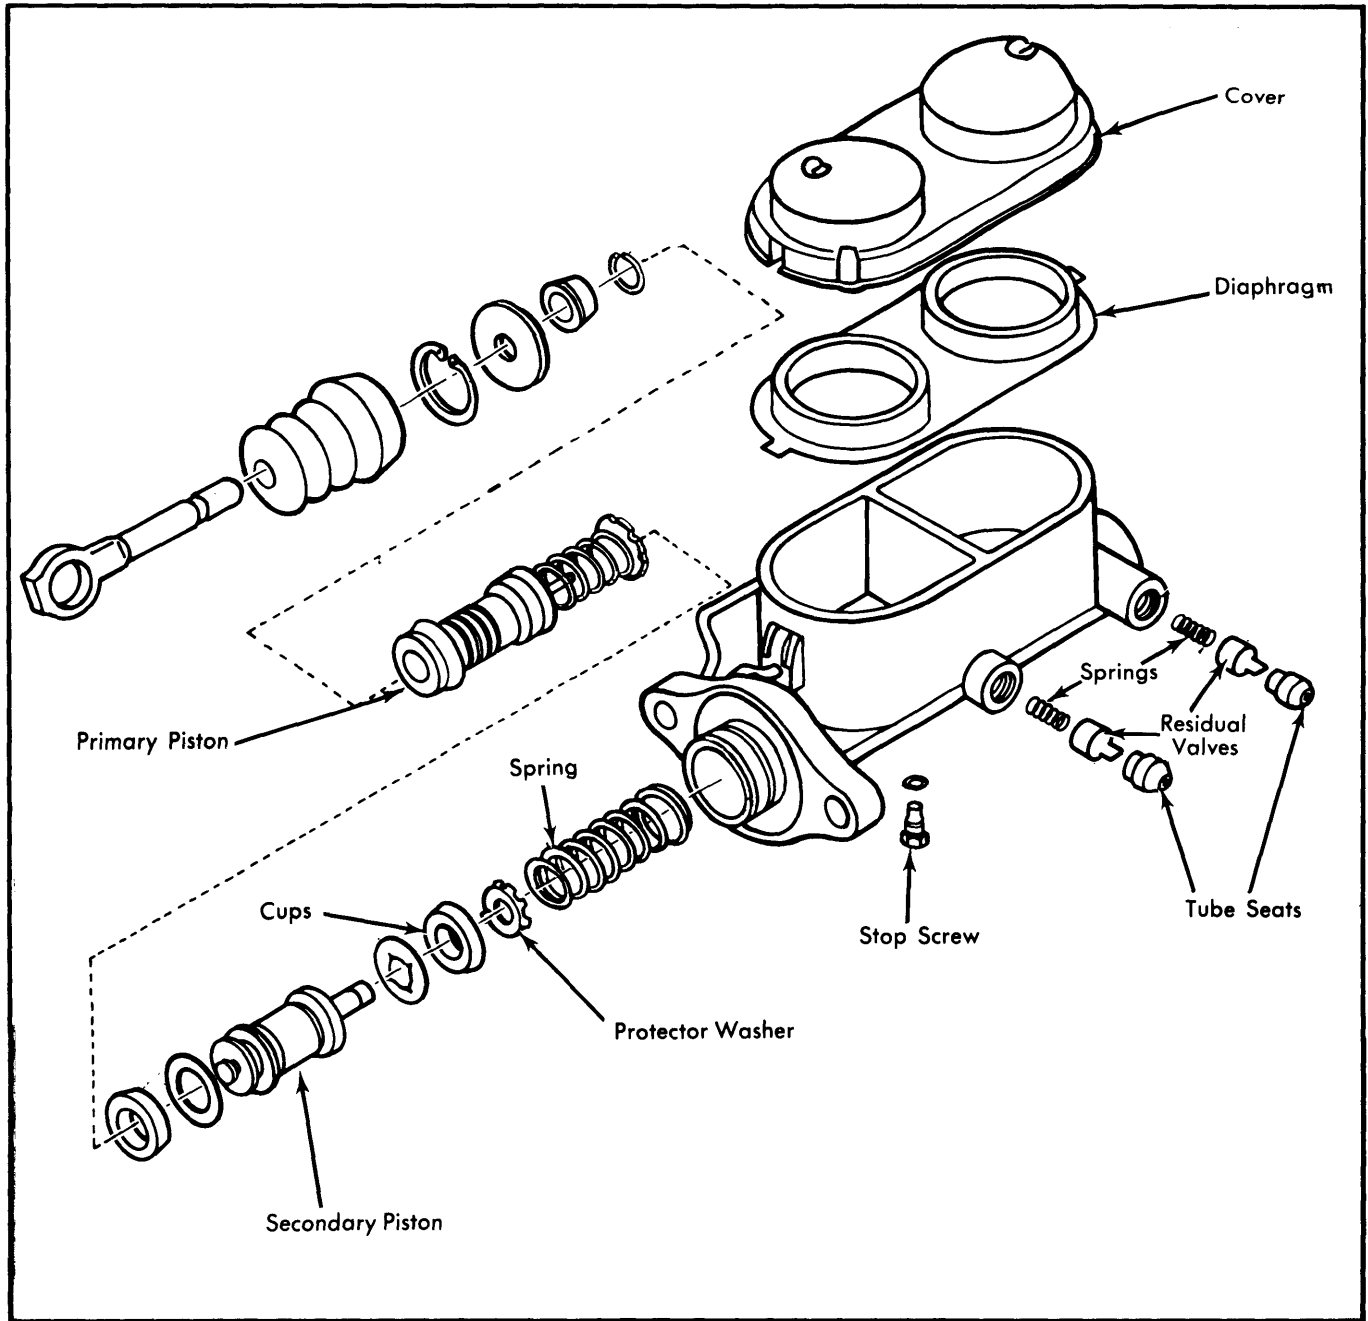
Exploded View of Delco-Moraine Master Cylinder (Typical)
